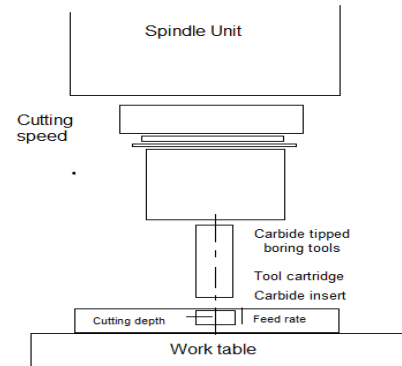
shows the machining setup of the boring process via a turning center. The experiments were carried out on a rigid computer numerical control (CNC) machine center with an 11 kW spindle motor at 6000rpm (machine type of Sinumerik 828 d, manufactured by M.Tab private ltd. India).
